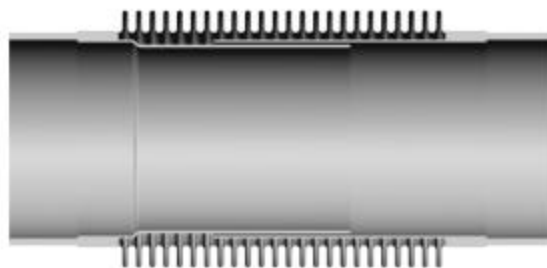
Typical hydroformed bellows design (cross section).
